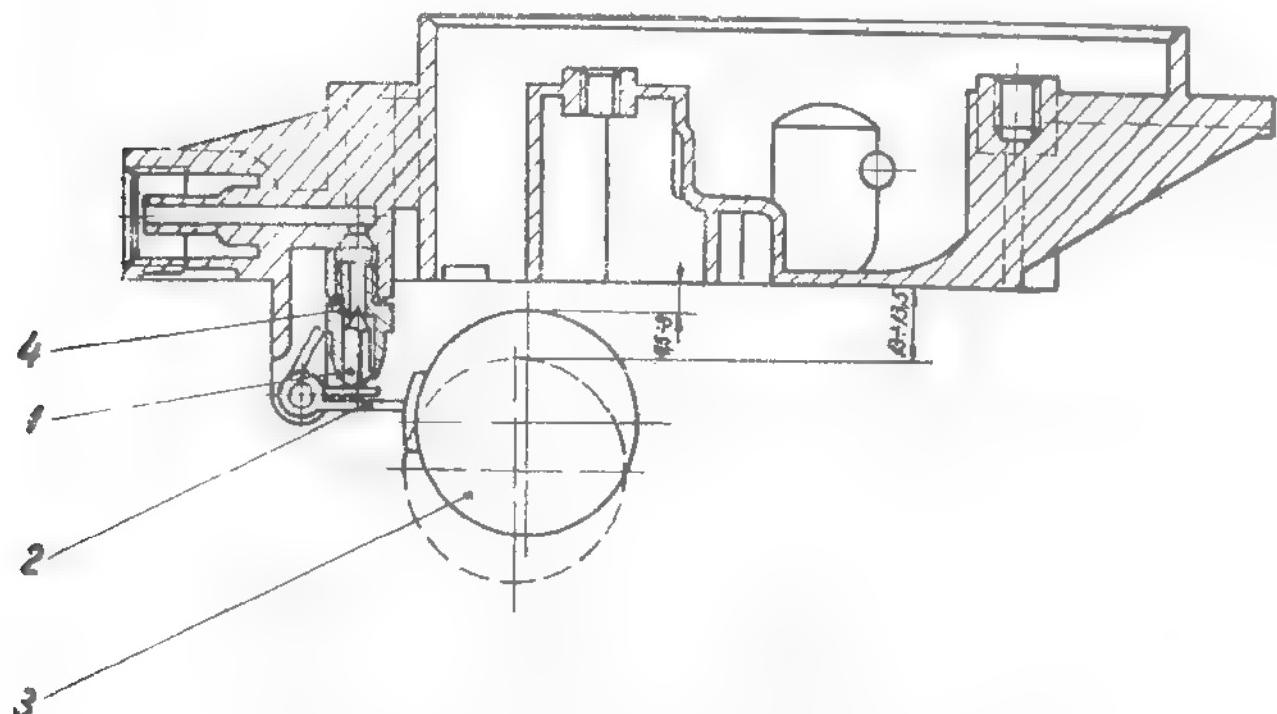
CARBURETTOR UPPER BODY WITH FUEL CONSTANT LEVEL MAINTAINING MECHANISM
